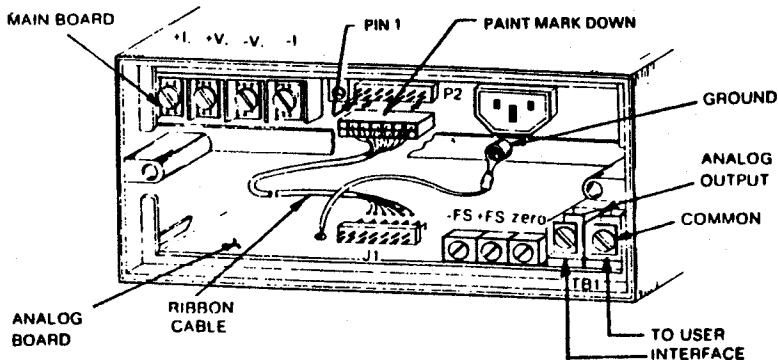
INSTALLING OPTION BOARD ON DISPLAY BOARD
